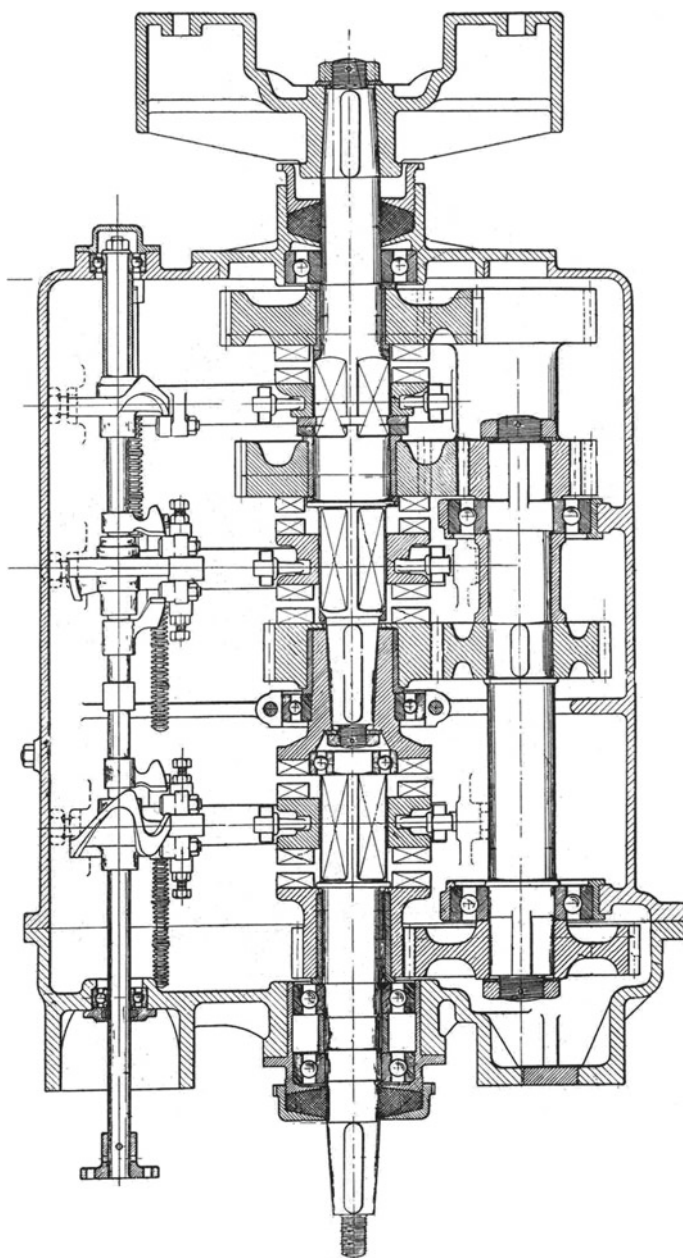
Dog clutch gearbox of a truck built in the 910s. Sliding trains are now reduced to small front tooth gears working as clutches (redrawn from Genta and Morello 2009)
